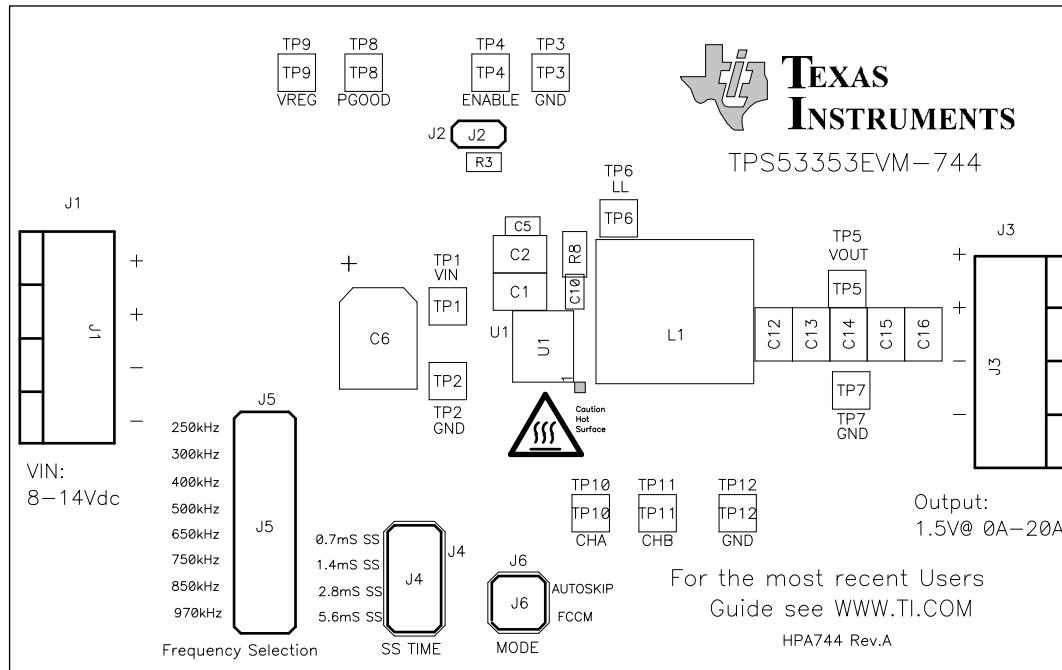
TPS53353EVM-744 Top Layer Assembly Drawing
